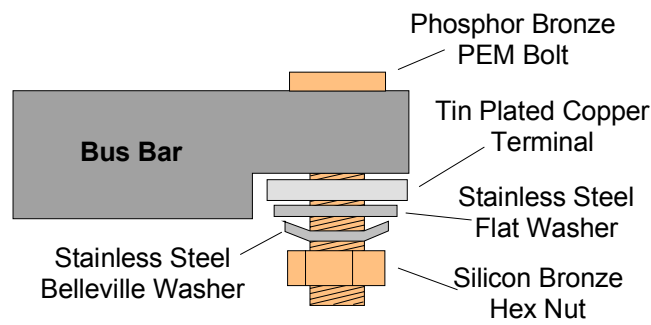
Mounting Hardware for Bus Bar Assembly sections 1 and 2
